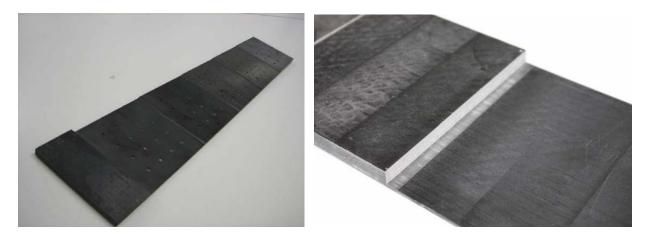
Step wedge part: complete view (left); detail view of the steps (right)
